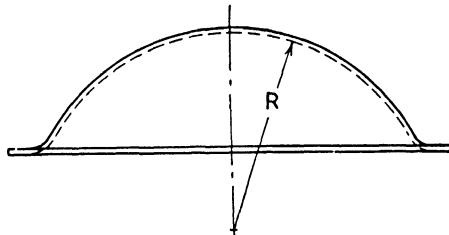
A first operation circular shell that is drawn similar to a spherical segment in form but of a more elongated section is the most convenient shape to use for redrawing into many types of shells.
